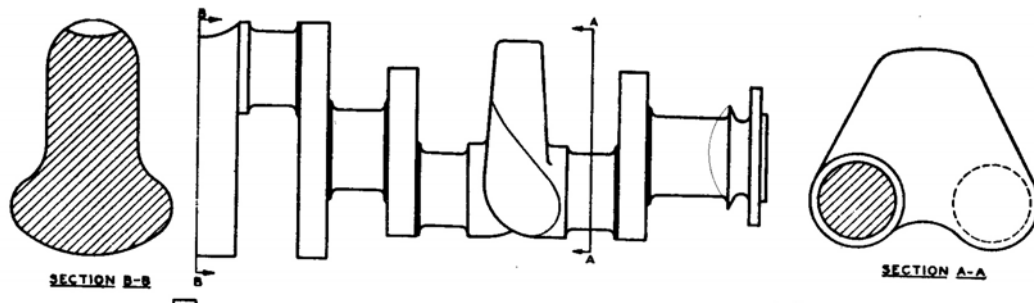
Rear half of four bearing, six-cylinder crankshaft
